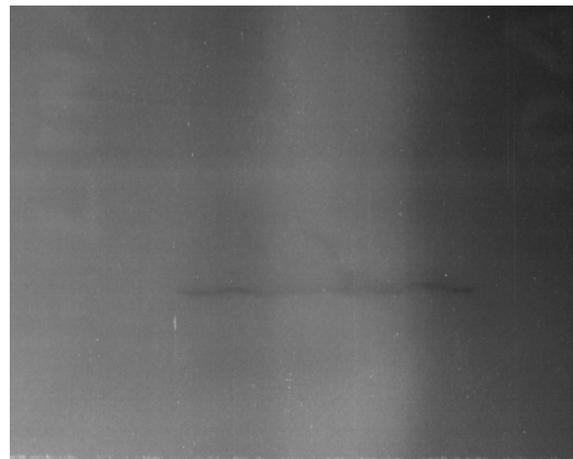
Crack in 160 mm thick weld (IPS with 4 MeV x-rays)
